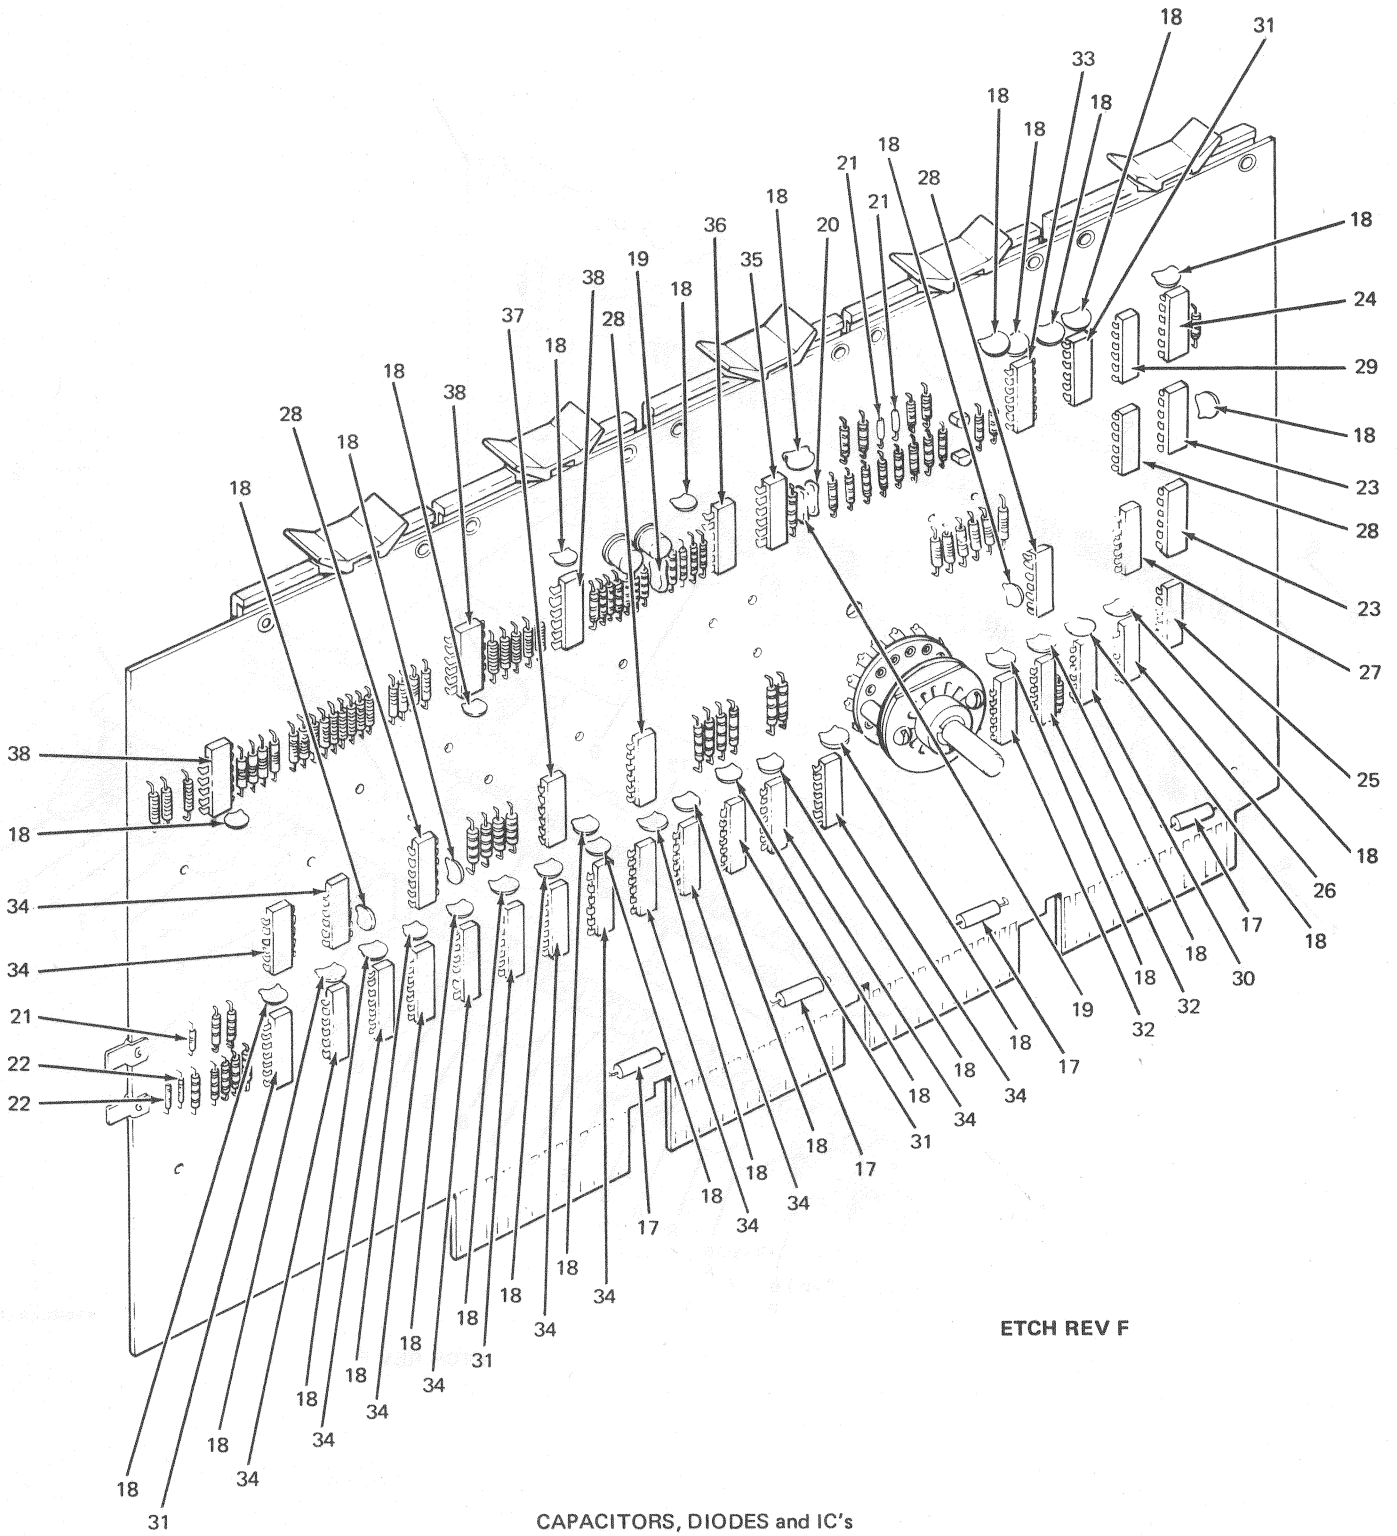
A. Front Panel Control Board Assembly (Etch Rev F) Sheet 2 of 3
